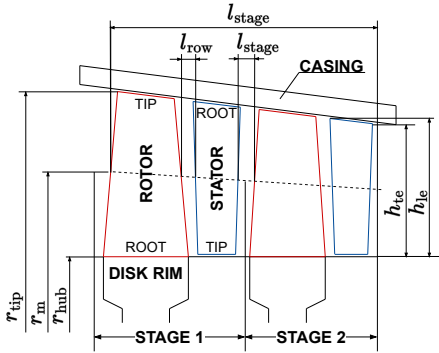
Sketch of the gas path of a two-stage compressor indicating major dimensions.
